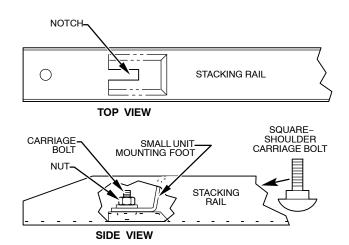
Secure Top Unit Mounting Feet to Stacking Rail Notches (53DS900076)
